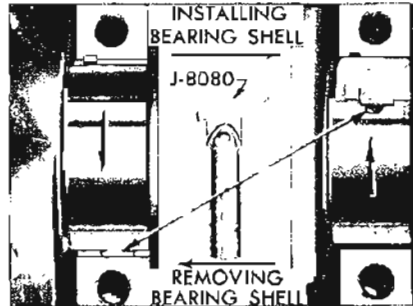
Removing and Installing Crankshaft Bearing Upper Shell
